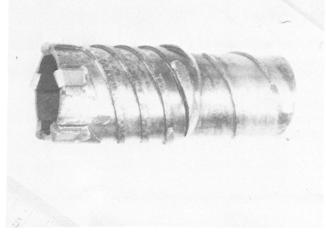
Drill bit with 5 tungsten carbide cutting tips. The bit is 6.0 cm long, and the narrow end is typical of threaded joints between the stem tubes.
